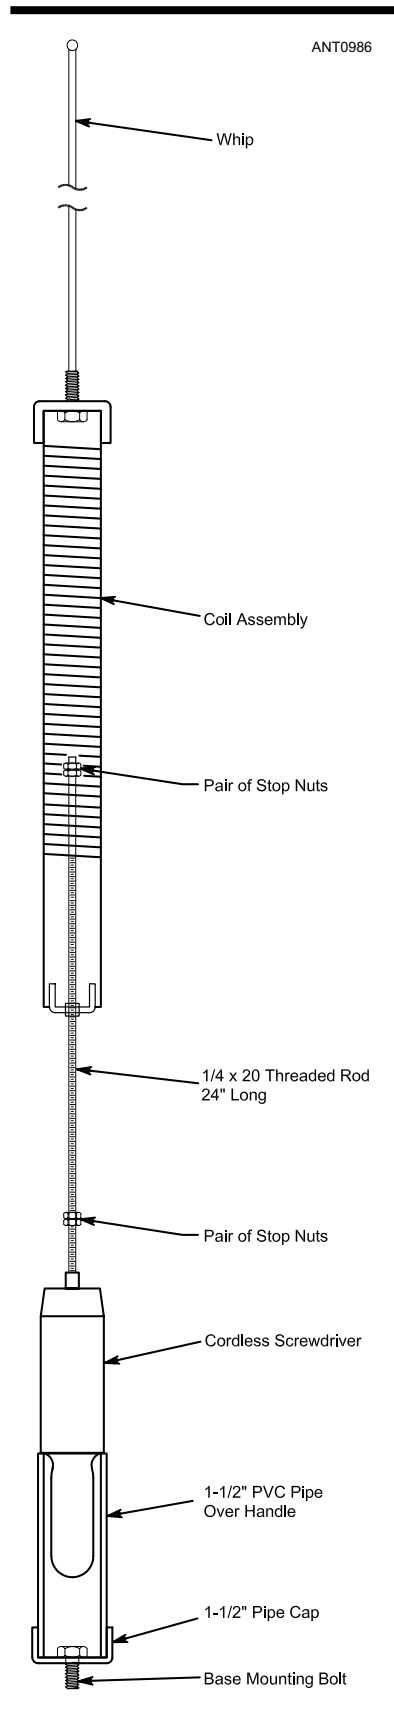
The coil assembly and cordless screwdriver drive assembly.
